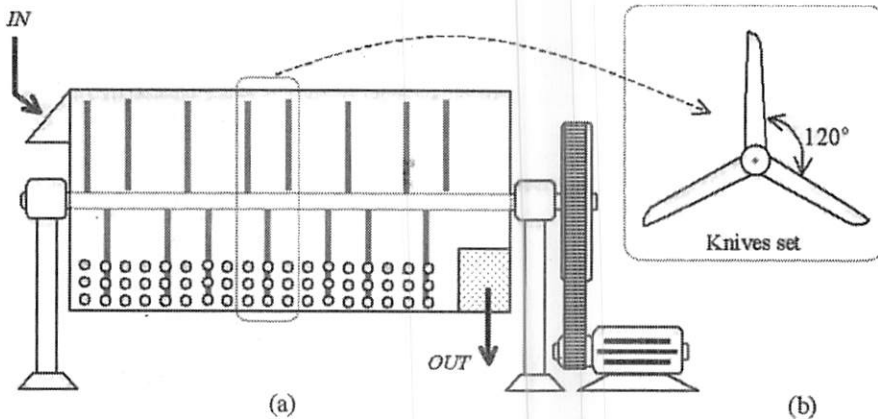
EFB Fiberizer Machine (a). The EFB Fiberizer machine and (b). The knives set of the machine
